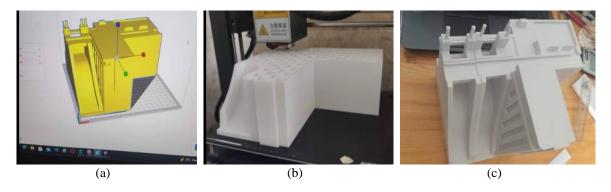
Prototype design steps (a) design dam (b) 3D printer print design and (c) final form
